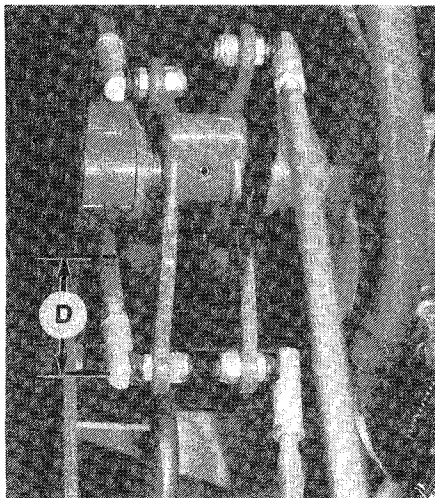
View of speed selector upper control rod and center control arm. Refer to text for dimension (D) and adjustment procedure.
